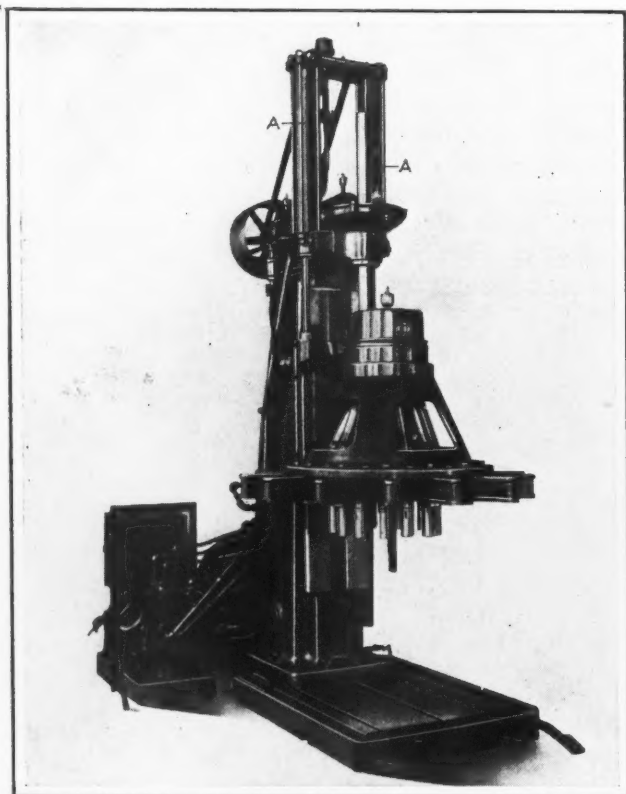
Harrington Multiple-spindle Drilling Machine with Oilgear Equipment
